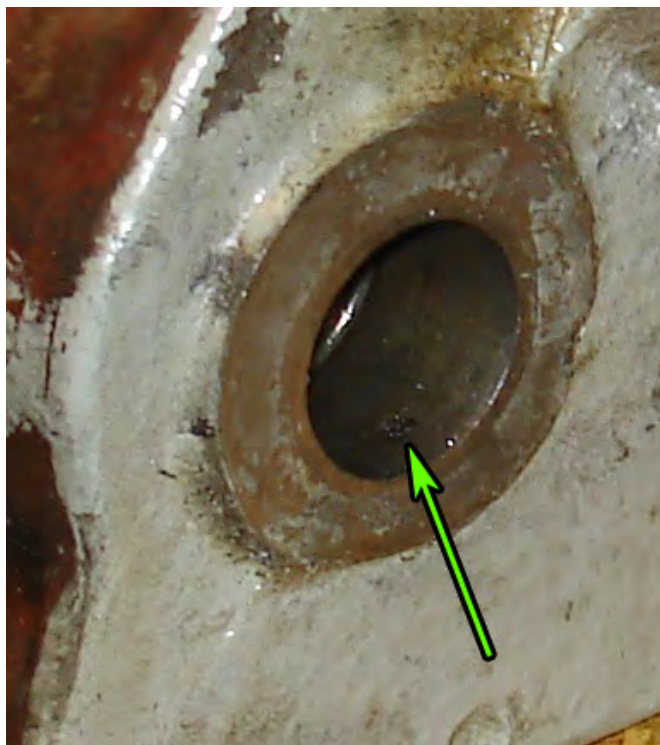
Location of a small wick in the leadscrew output port of the gearbox.
